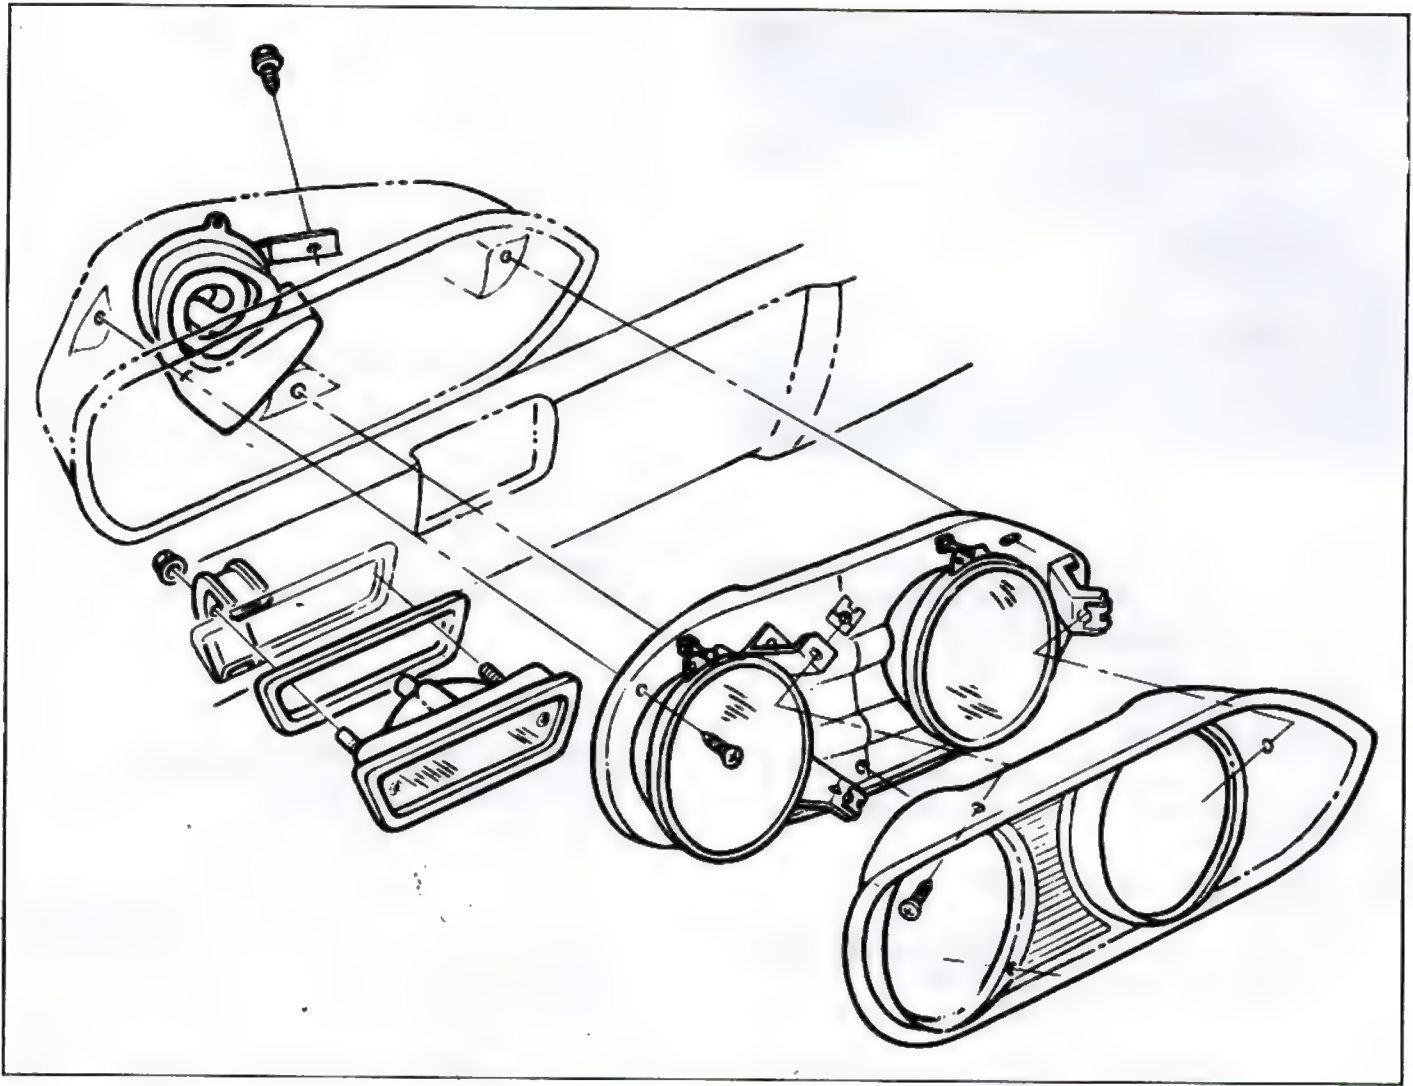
Headlamp, Parking Lamp and Horn Assemblies
